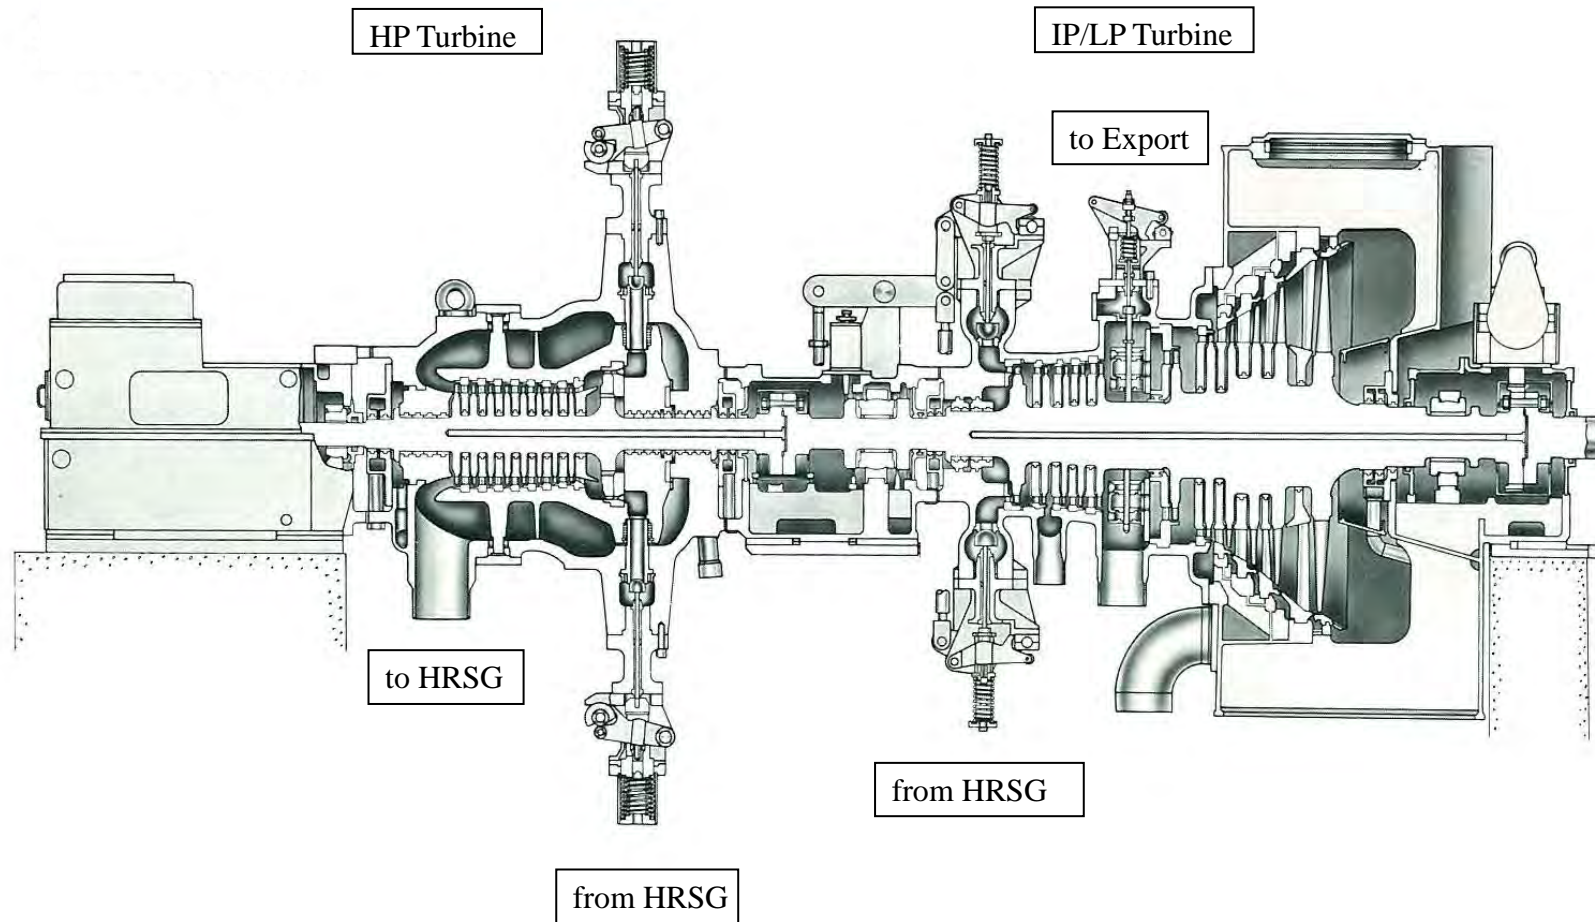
Longitudinal Section of Typical Steam Turbine
